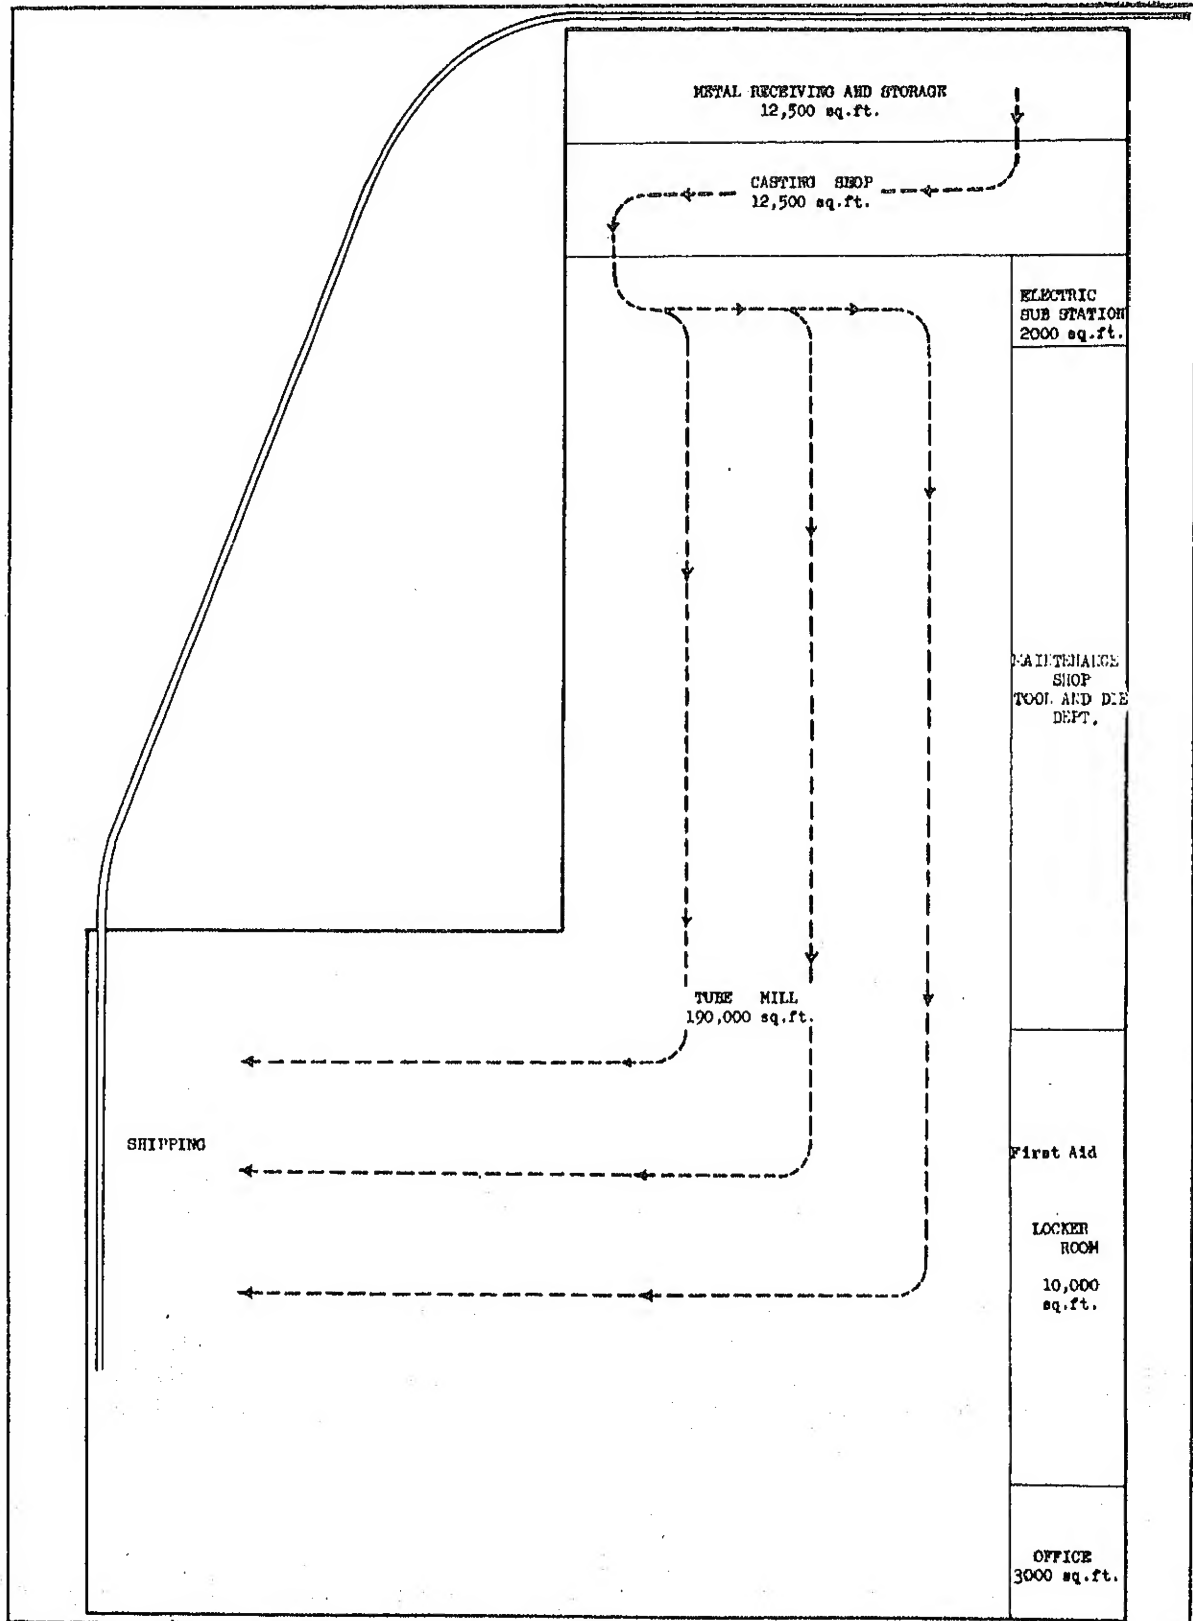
Floor plan and flow sheet of a typical copper and copper-base-alloy tube mill
